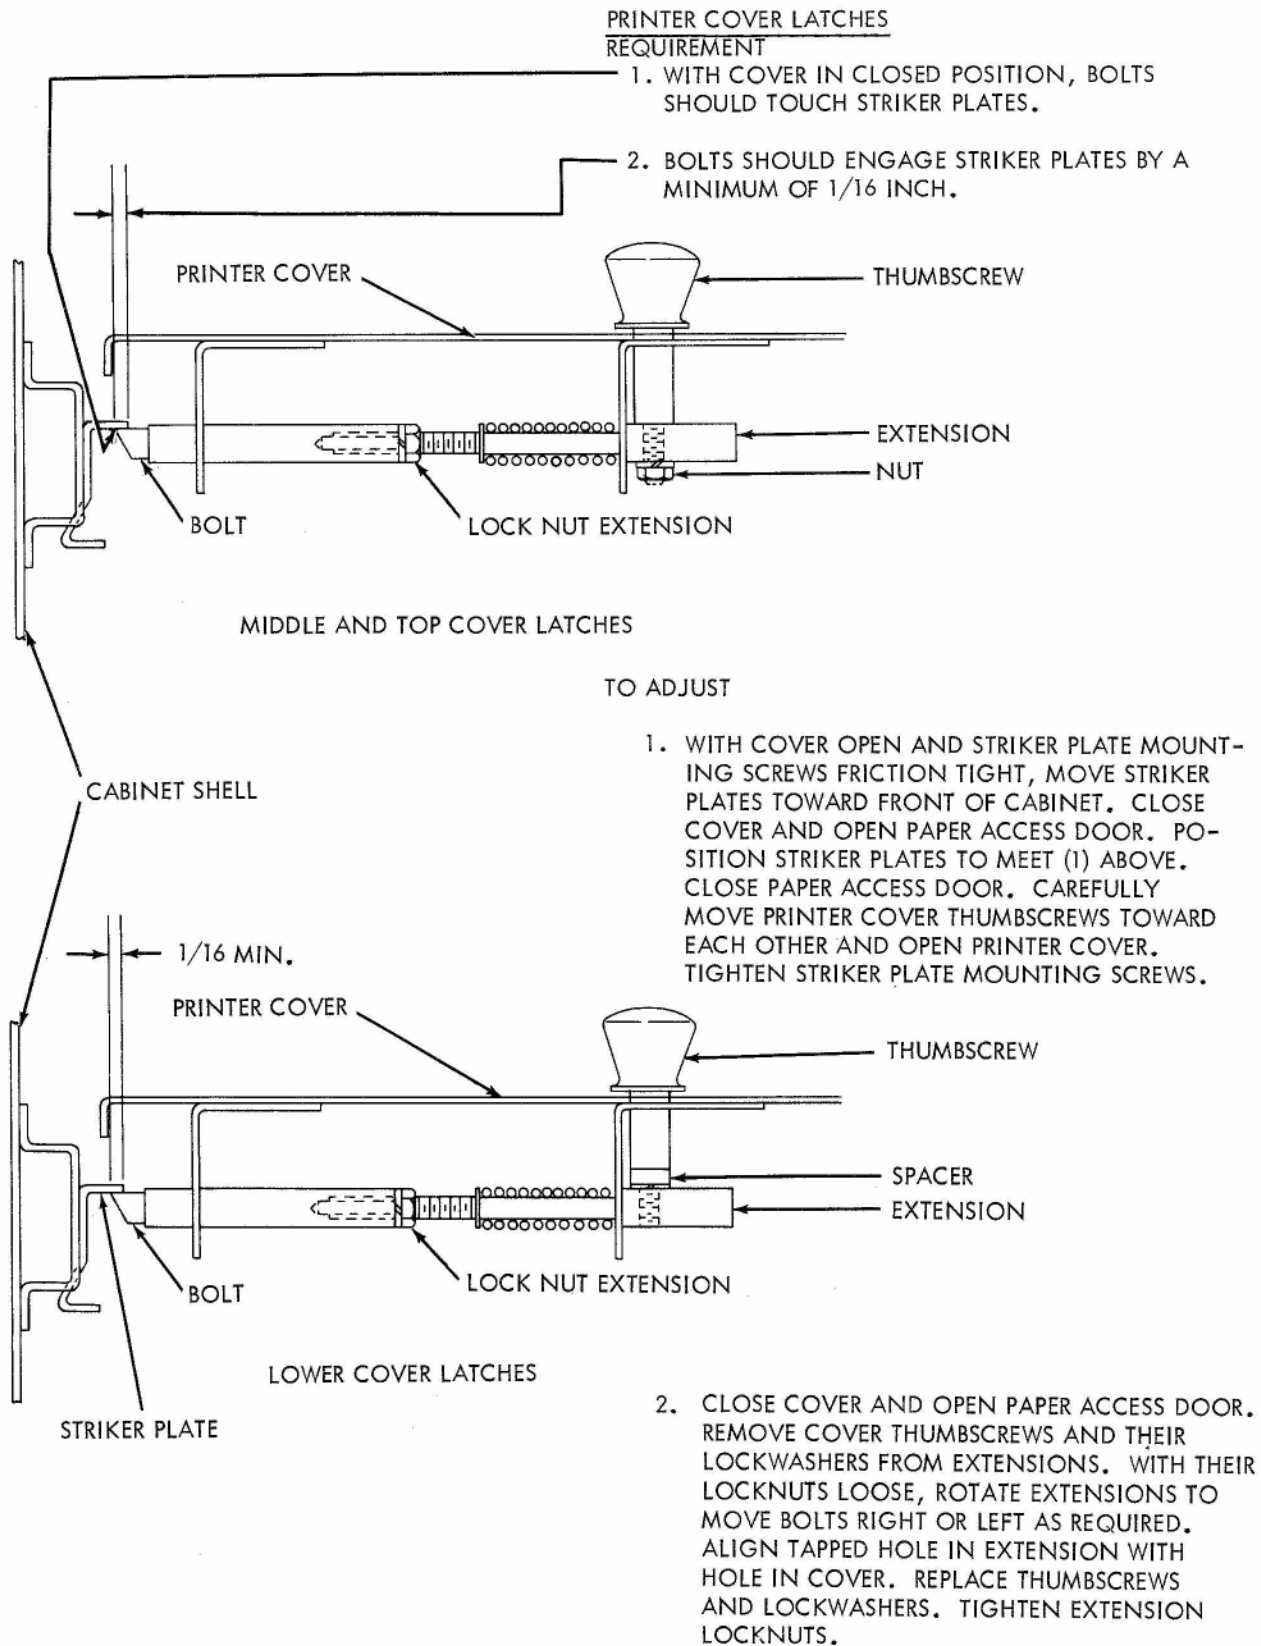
CABINET, FOR MULTIPLE MOUNTING PAGE PRINTERS
